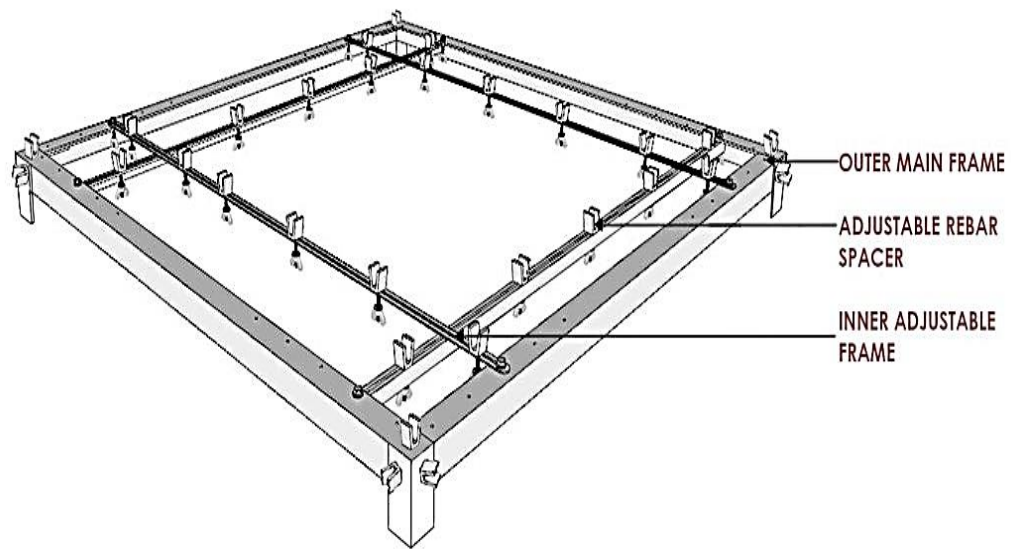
Perspective Drawing of the Mat Bar Setter and Parts
